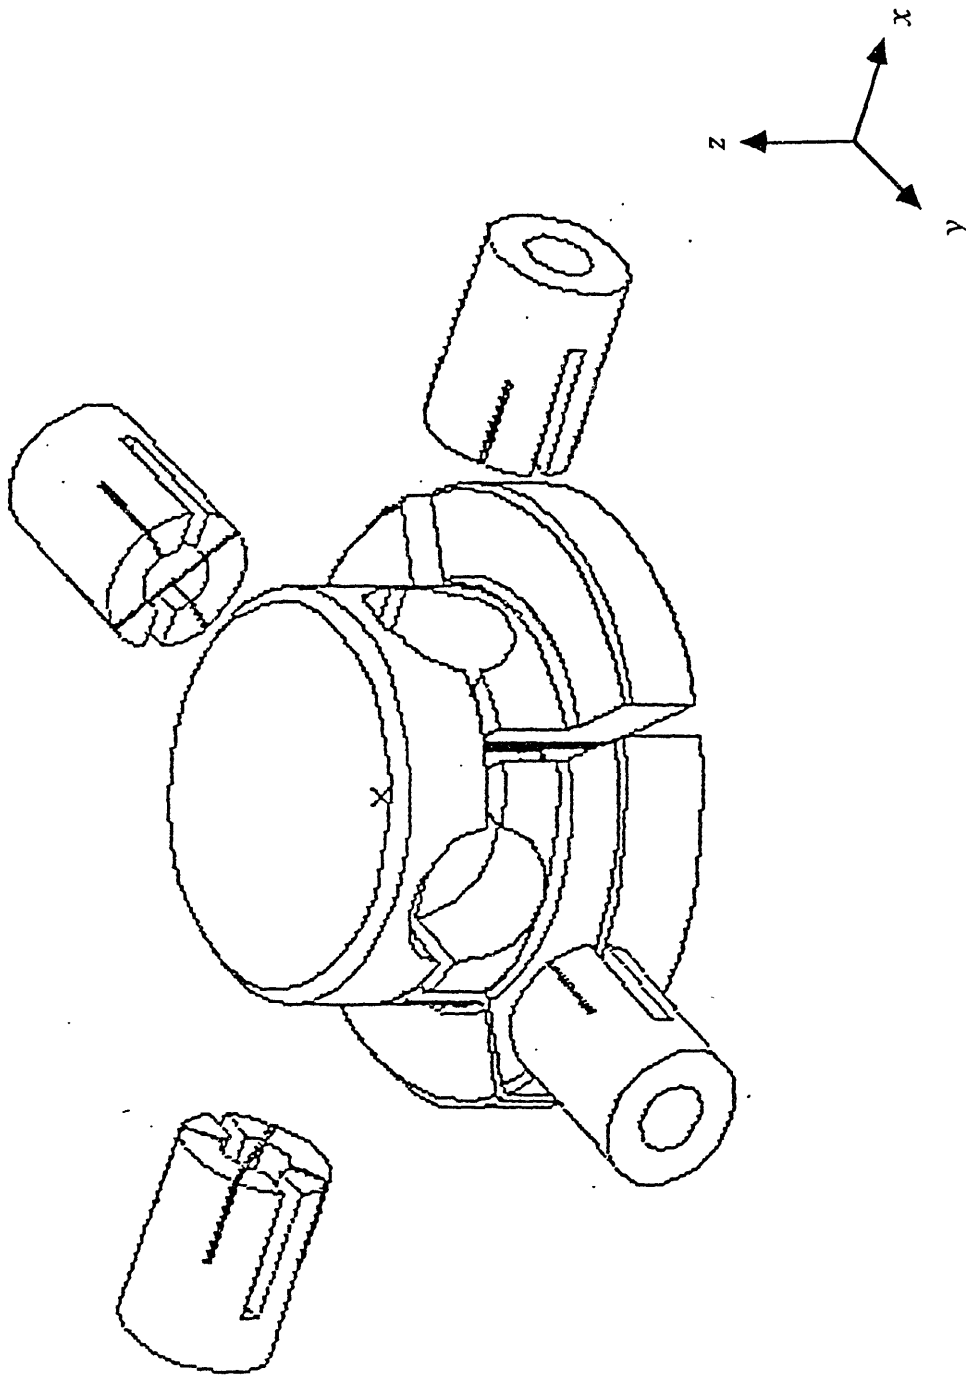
Brazing of the Jig Assemblies into the Frame Pieces
